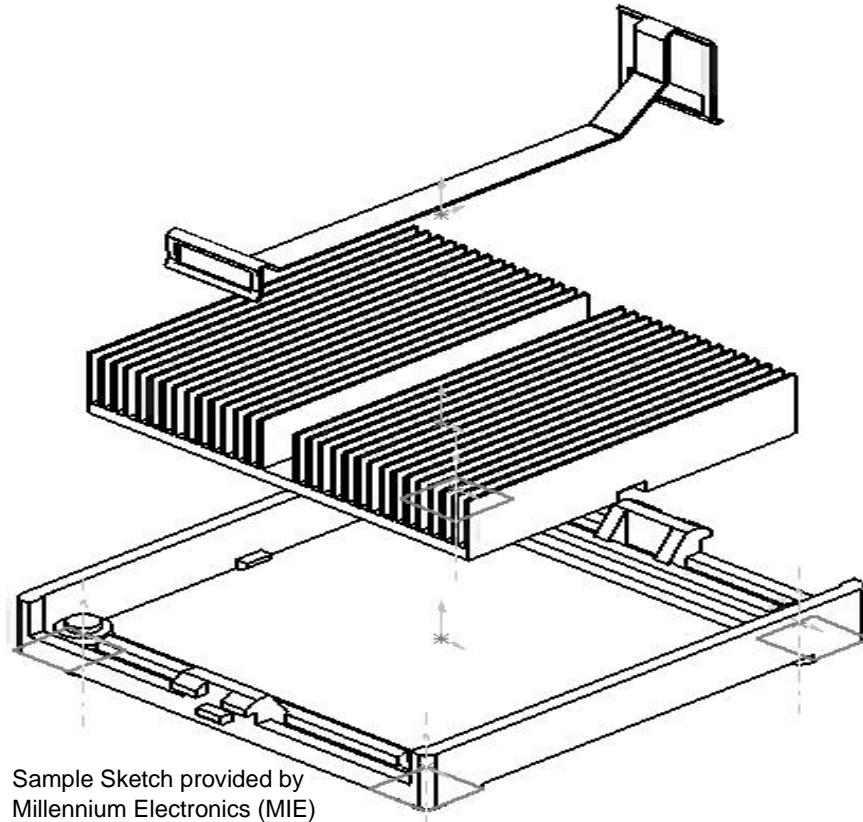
Exploded View of a Heat Sink Attachment using a Plastic Force
